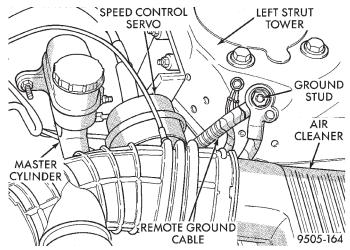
Remote Ground Cable Attachment To Strut Tower
